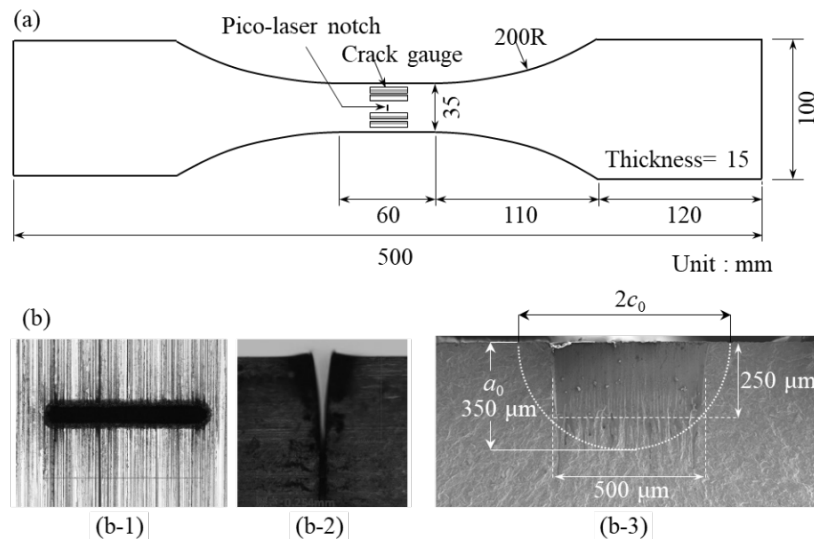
Surface crack propagation specimen with pico-second laser notch and notch details.
